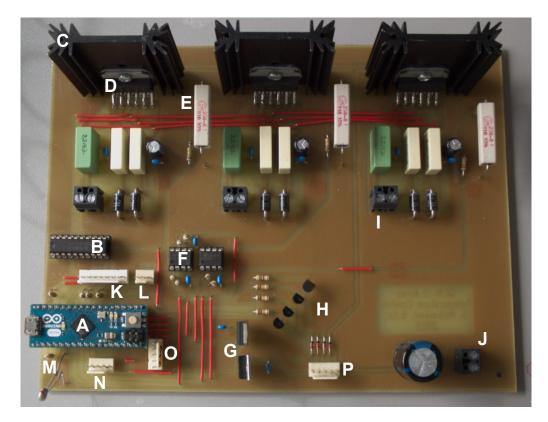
Assembled printed circuit board; A: Arduino Micro, B: Bus driver, C: Heat sink, D: Motor driver, E: Shunt resistor, F: Current measurement, G: Voltage regulators, H: Fan drivers, I: Peltier connector, J: Power supply connector, K: LED connector, L: Temperature sensor connector, M: Room temperature sensor, N: Potentiometer connector, O: 7 Segment display connector, P: Fan connector
